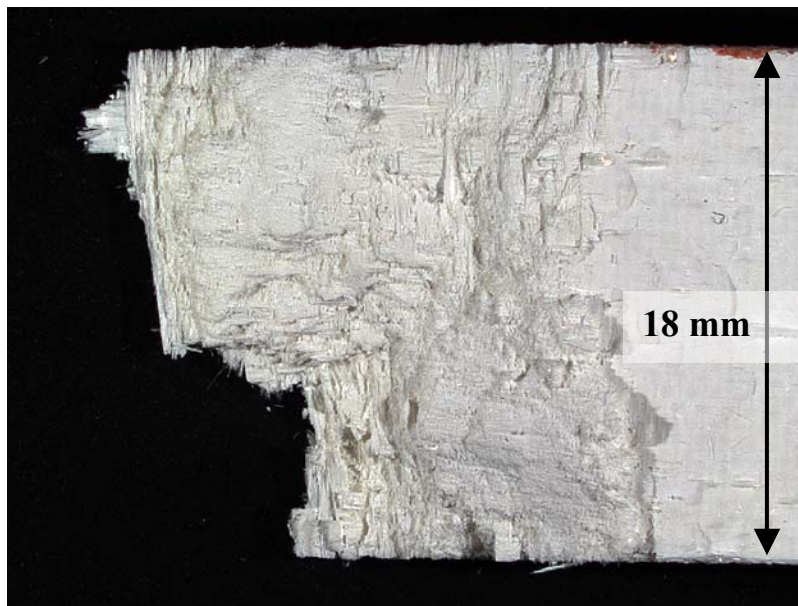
Fracture surface of N720/A specimen tested in compressive creep at -40 MPa for 100 h at 1200°C in steam.
